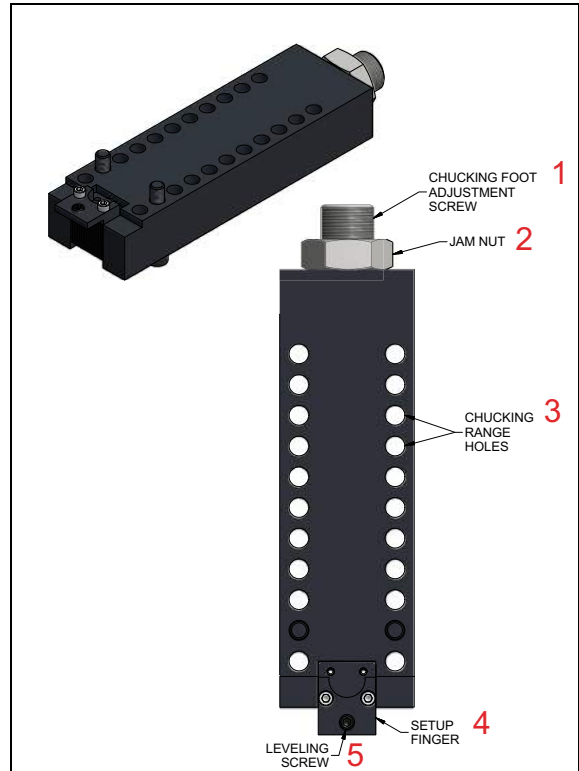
FF3600 CHUCKING FOOT COMPONENTS
